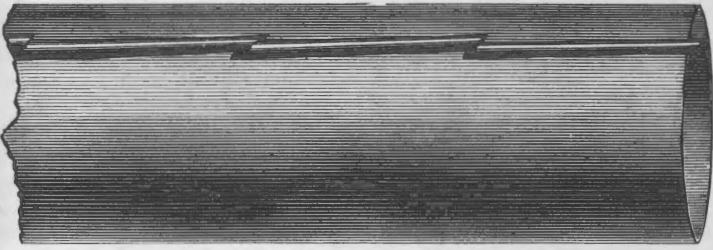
Pipe with interior "shingle-roof." (See p. 412.)
